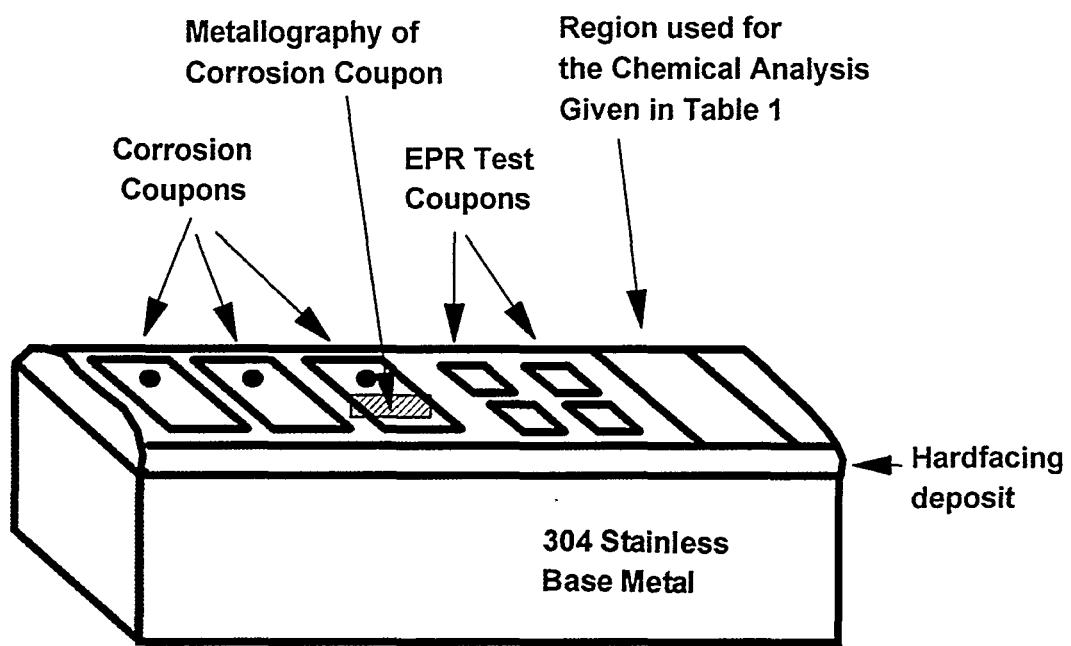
Schematic of machining orientation for the corrosion coupons, EPR test specimens taken from the top 0.20 cm of the 0.50 cm thick hardfacing deposits, and region used for chemical analysis for NOREM 02 and NoCo-M2 deposited on type 304 stainless steel.
